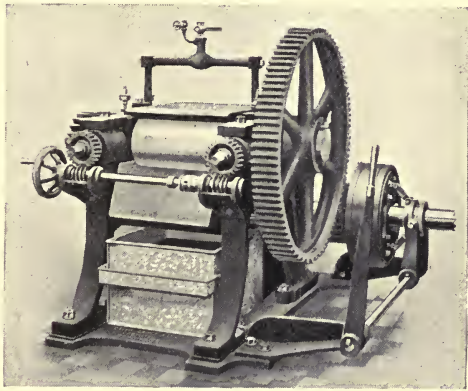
A Mill—Type J.A.—driven by Gearing with Friction-clutch (Bridge & Co.).
